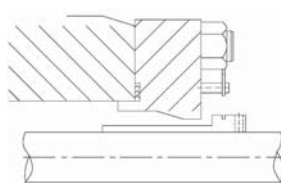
Cartridge seal with its Locking Washer or Locating Fixture removed and ready to start operating.
